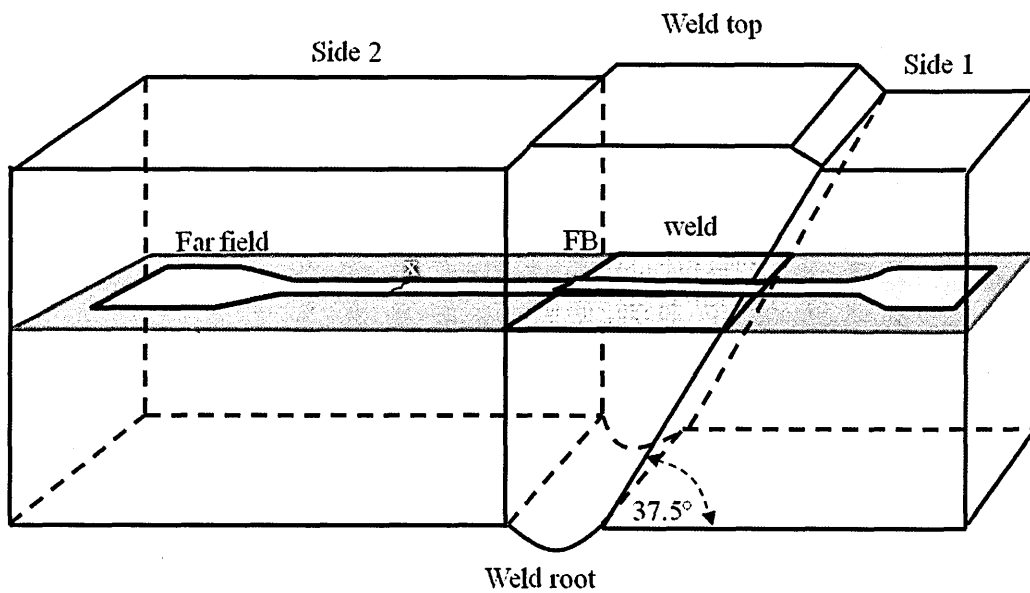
3D schematic drawing of Weld-3 illustrating the plane and position of cross-weld creep specimen used for DIC measurements. The specimen rupture position is indicated by “x”.
